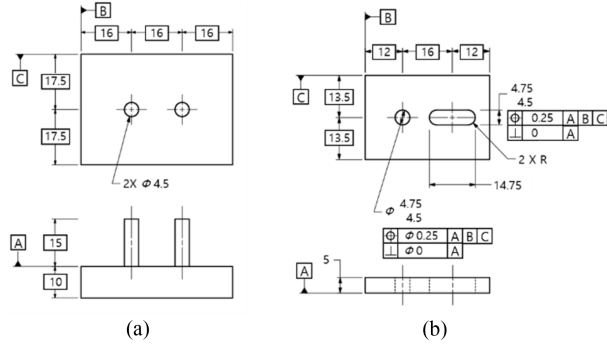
Drawings of the exactly constrained assembly design: (a) Part A, and (b) Part B. All numbers in [mm]
